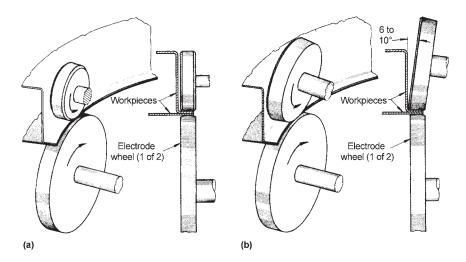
Position of electrode wheels on seam welding machines: (a) circular machine and (b) longitudinal machine. Source: Ref 3.4
